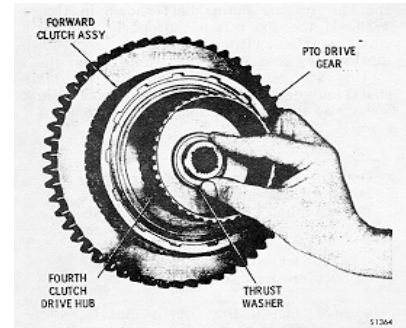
Installing thrust washer at rear of forward clutch hub
